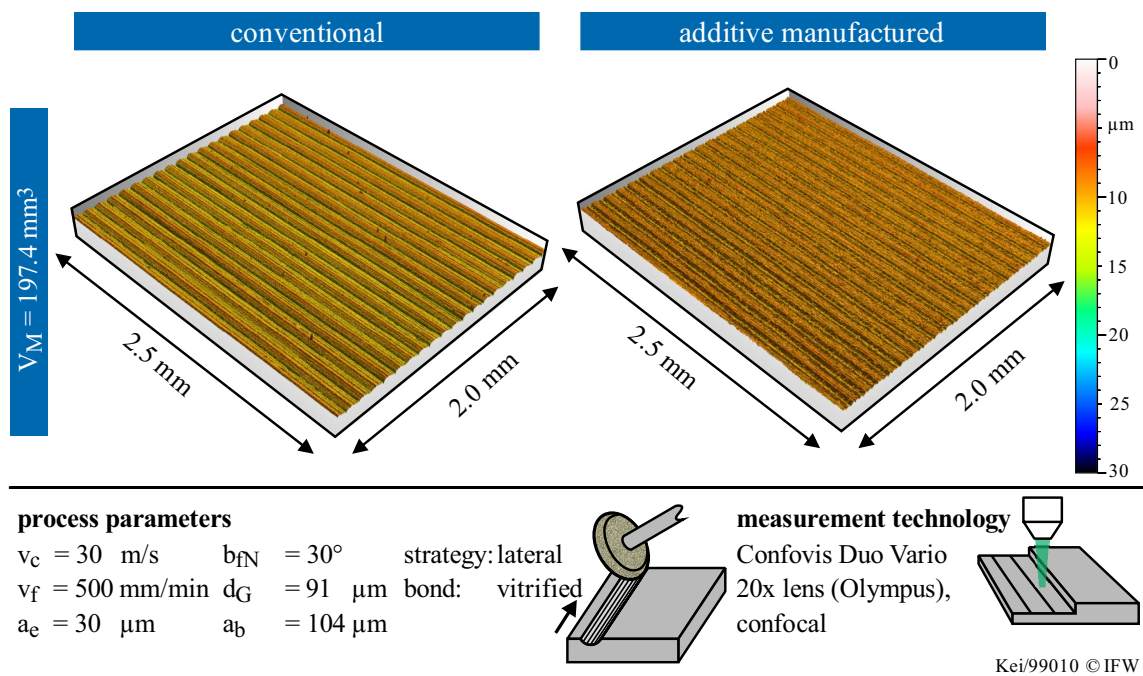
Workpiece surfaces after a machined volume of $V_M = 197.4 \text{ mm}^3$
